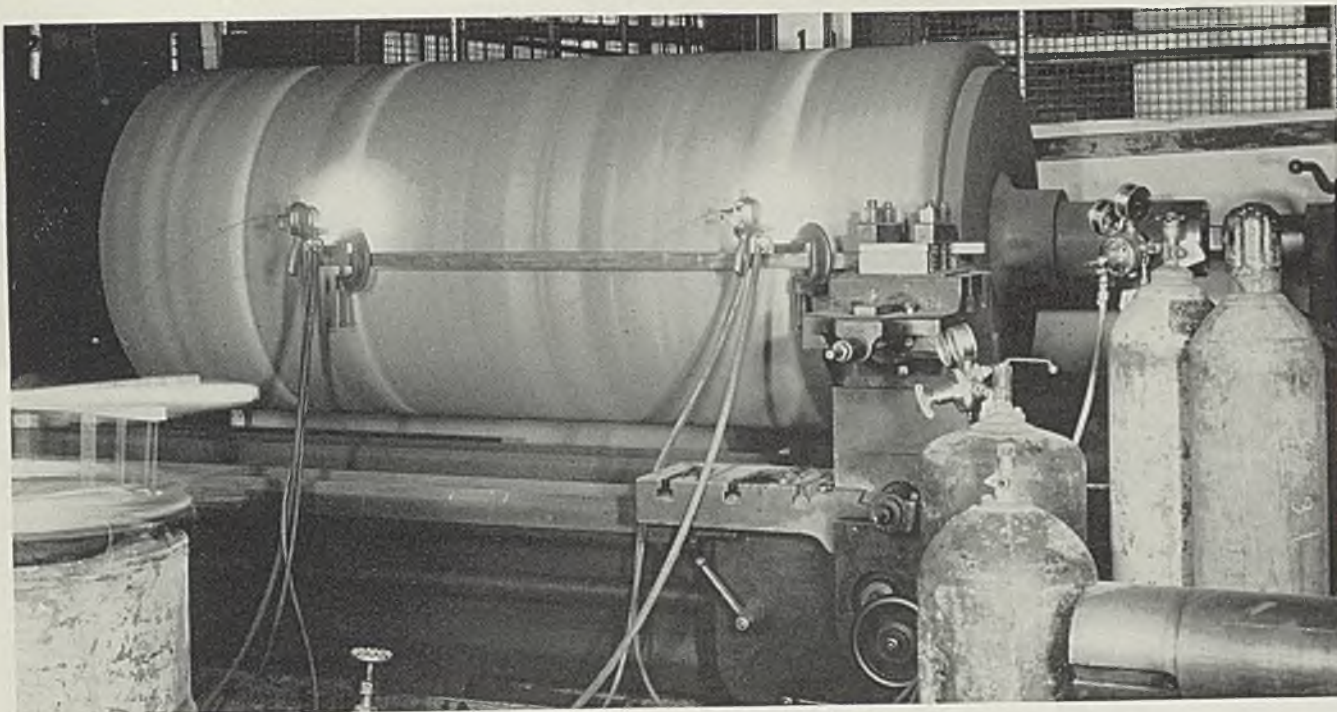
Spraying a special variety of 18-8 stainless steel on surface of large sugar mill roll. About 0.125-inch on the radius is sprayed. This shows the use of a two-gun setup with a lathe being employed to revolve the work and to move the guns. Such an arrangement is common in production work. Three or more guns may be employed for certain jobs
